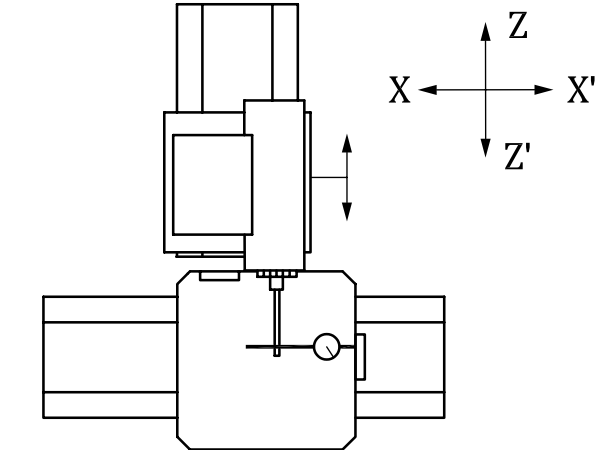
Typical example of horizontal machining centre with a non-rotating Table Machining centre ISO 10791-1 H [w Z' b X Y (C) t] (see [3.12](#))
